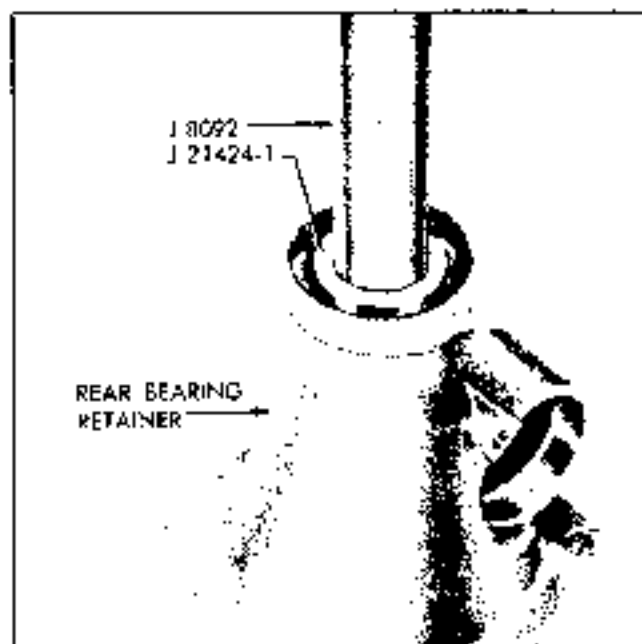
F-10 Installing Rear Bearing Retainer Bushing
